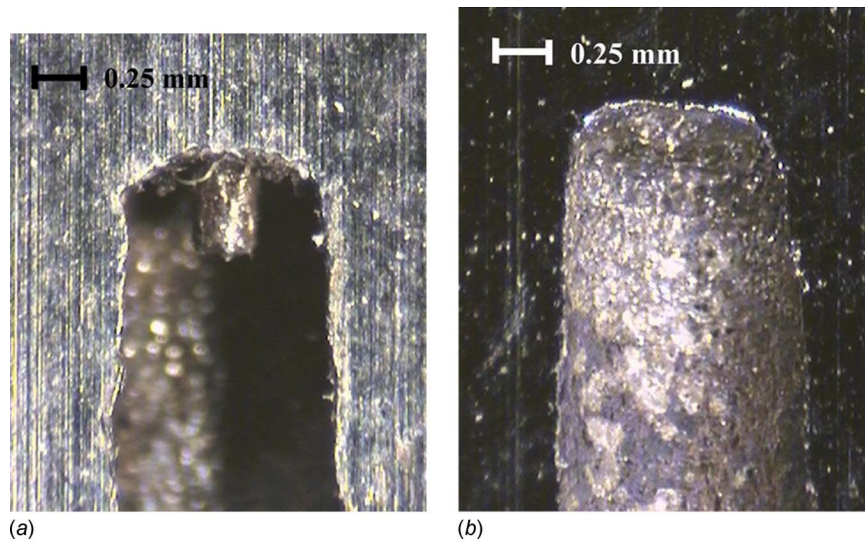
Cross-section view of blind hole tips: (a) EDM drilled using a tubular electrode and (b) EDM modified using a solid electrode
